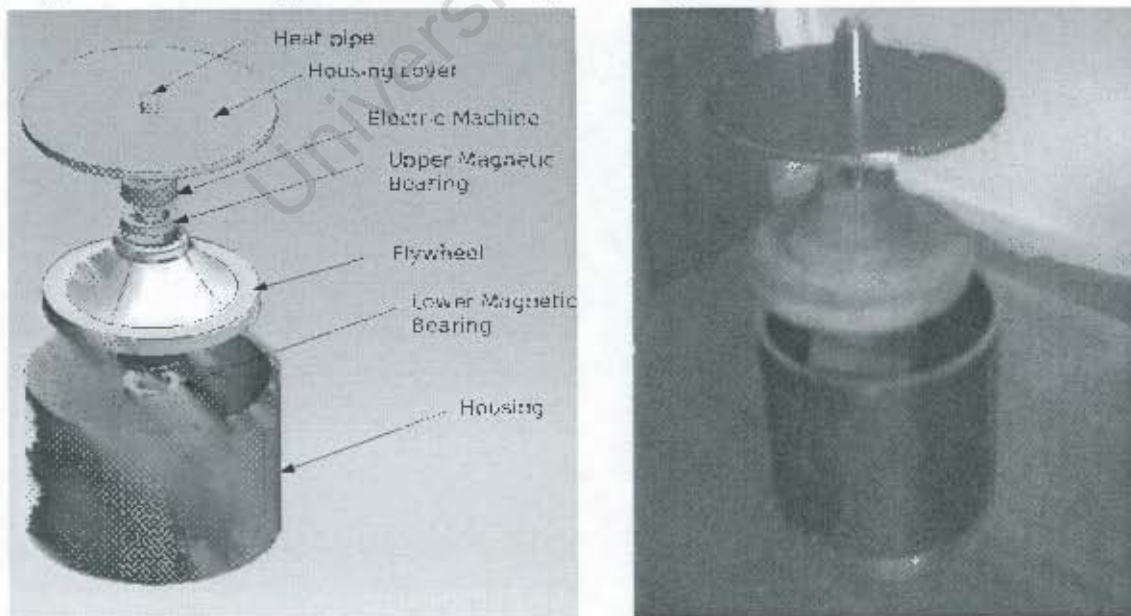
A):EXPLODED VIEW CAD DRAWING B):EXPLODED VIEW PROTOTYPE
